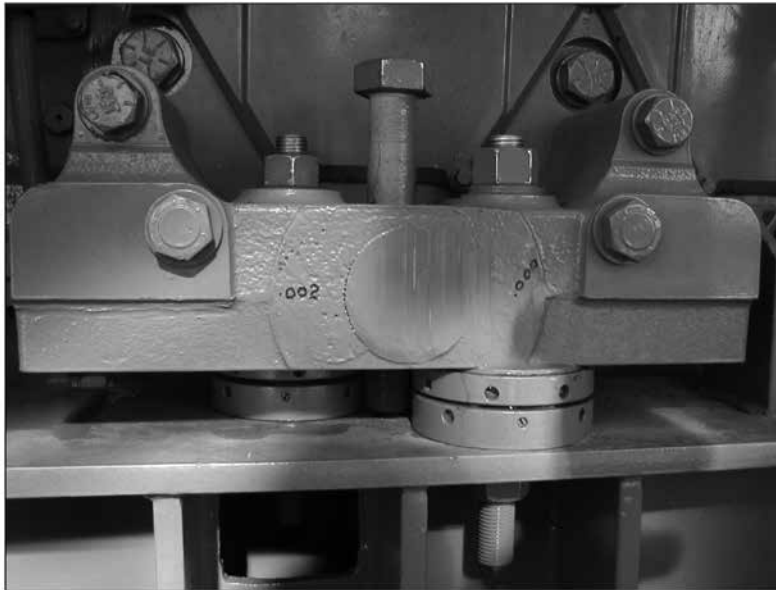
Adjustable Chocks Used for Engine Mounting Require Soft Foot Check
